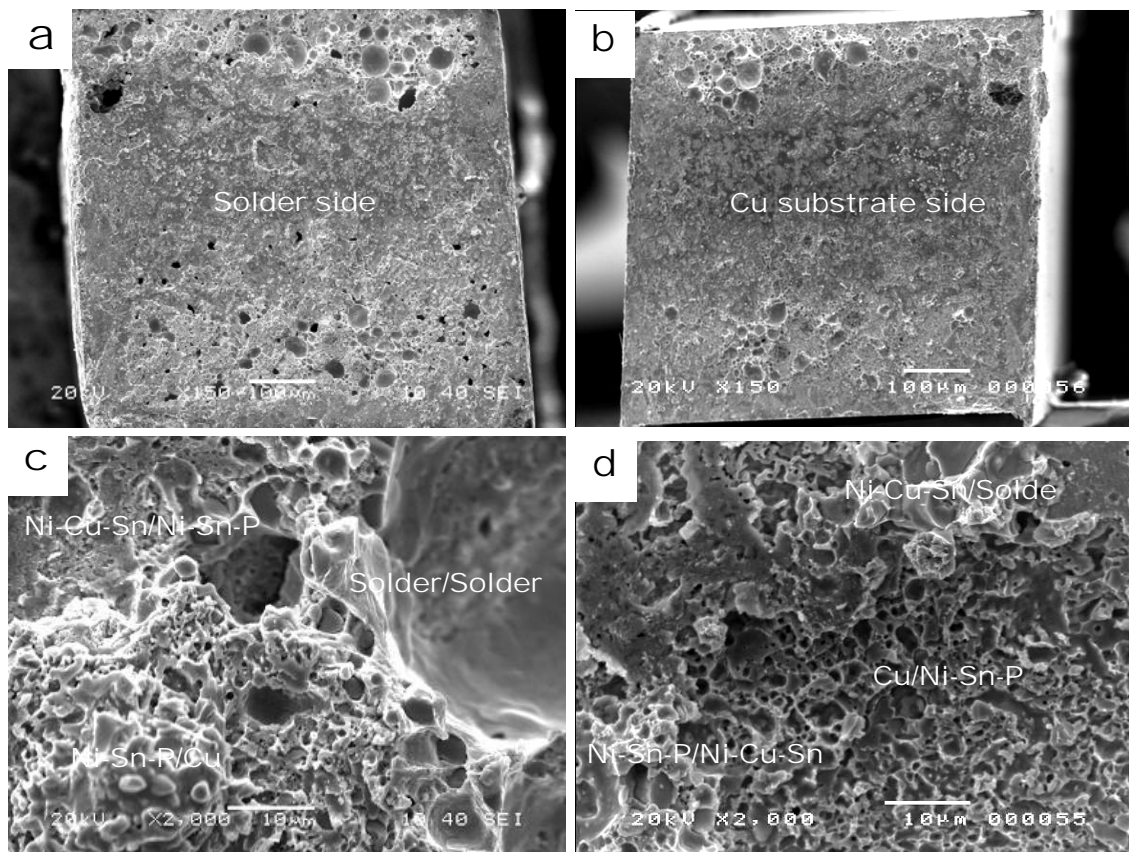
Fracture surfaces of low P sample after 20 reflows (a) solder side, (b) Cu substrate side, (c) magnified image of solder side, (d) magnified image of Cu substrate side, showing that fracture occurred at mixed solder/solder, solder/Ni-Cu-Sn, Ni-Cu-Sn/Ni-Sn-P, and Ni-Sn-P/Cu interfaces.
